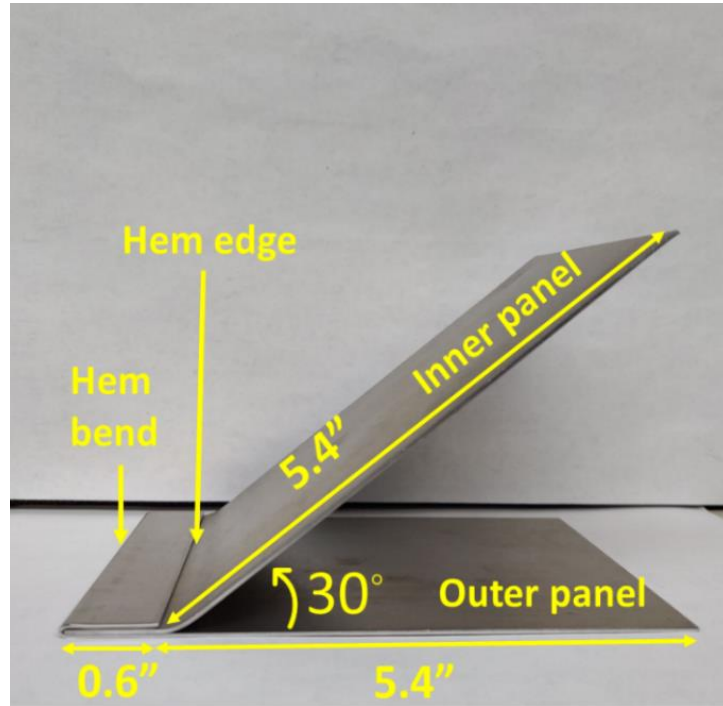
Photograph of the hem flange test specimen prepared in-house for ASTM G85 corrosion testing.
